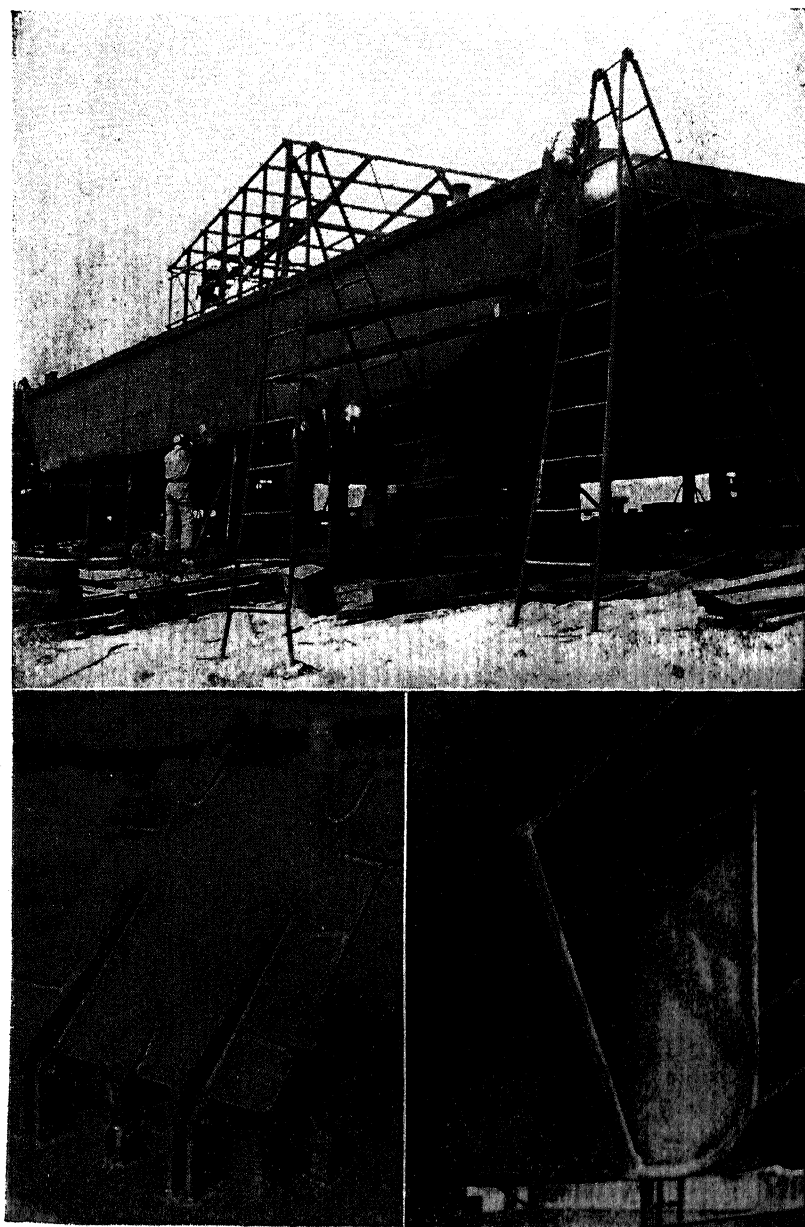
Construction views of all welded derrick barge used for drilling operations along the Gulf coast. 70 ft. by 36 ft. by 8 ft. Lower left: Close-up of all welded hatch. Lower right: Construction at stern showing shears.
